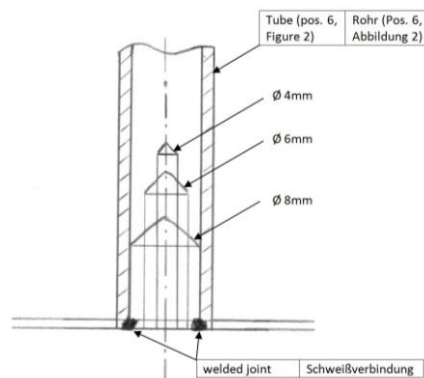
Sketch welded joint / Abbildung 3 Skizze Schweißverbindung
